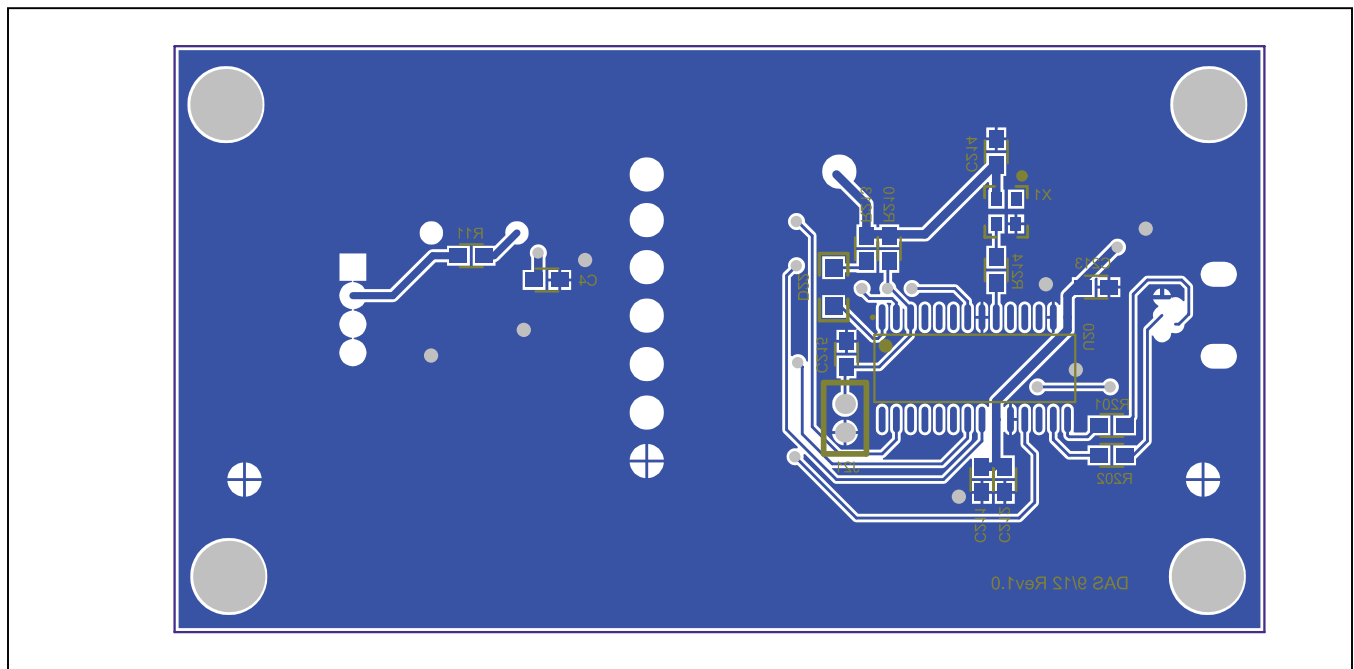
MAX31865 EV Kit PCB Layout—Bottom
